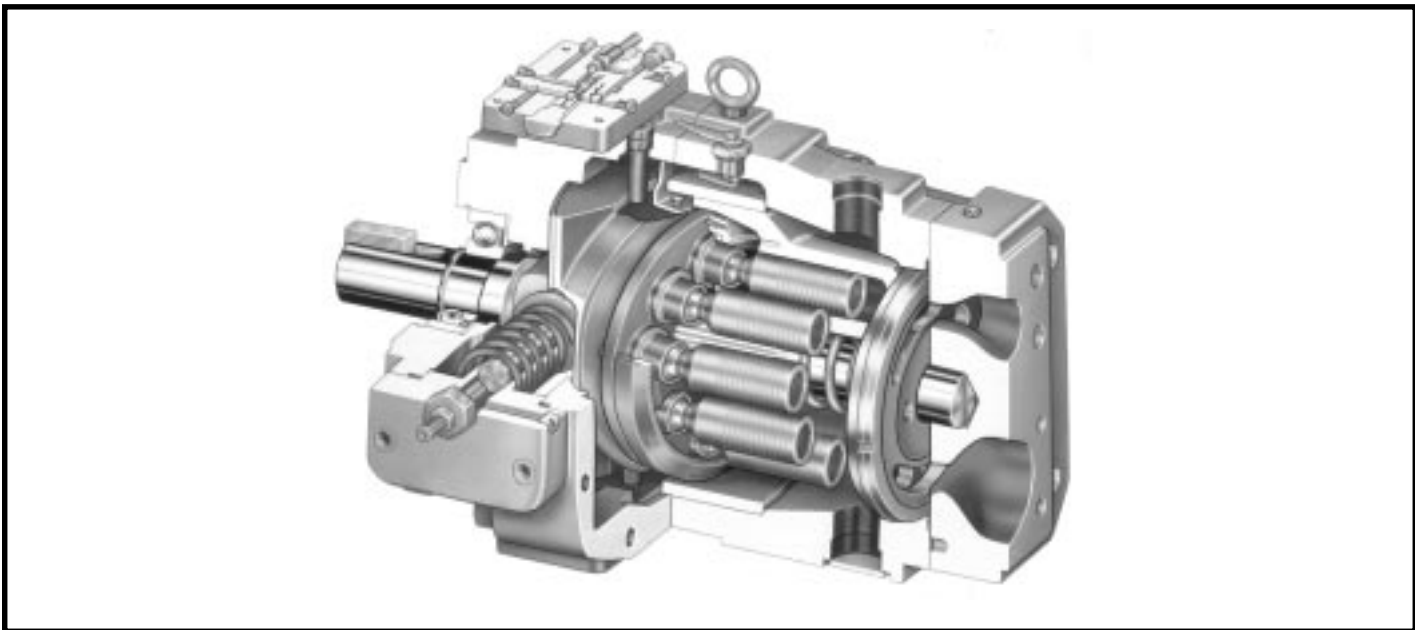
Cut-a-way view of typical Oilgear "PVV" Pump (92012R).
